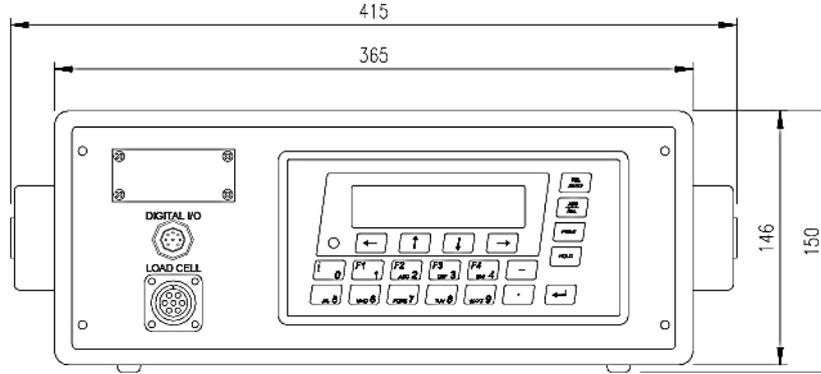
Mechanical dimensions and panel cut-out for INDI-ISO376
